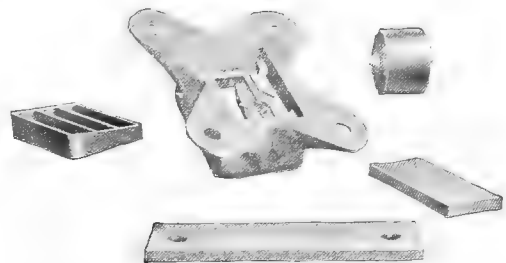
Parts of Single Roller Side Bearing for Freight Cars. Edwin S. Woods & Company.
